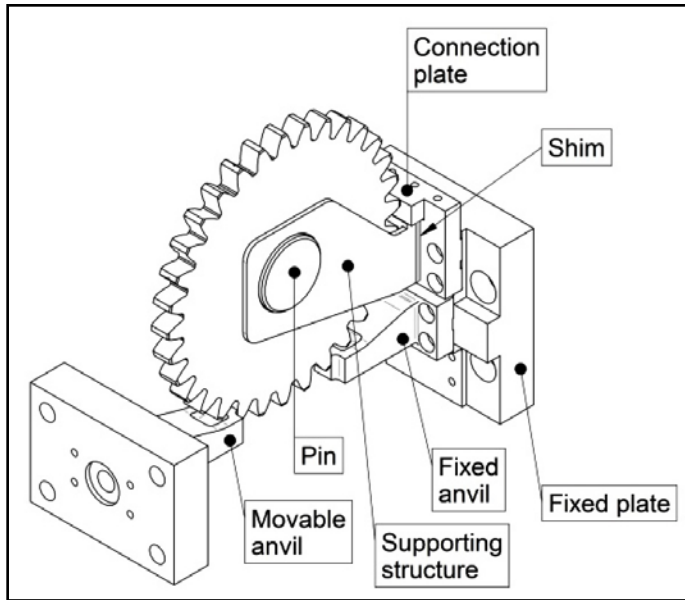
Bending fatigue test apparatus: 3-D schema and part nomenclature.
